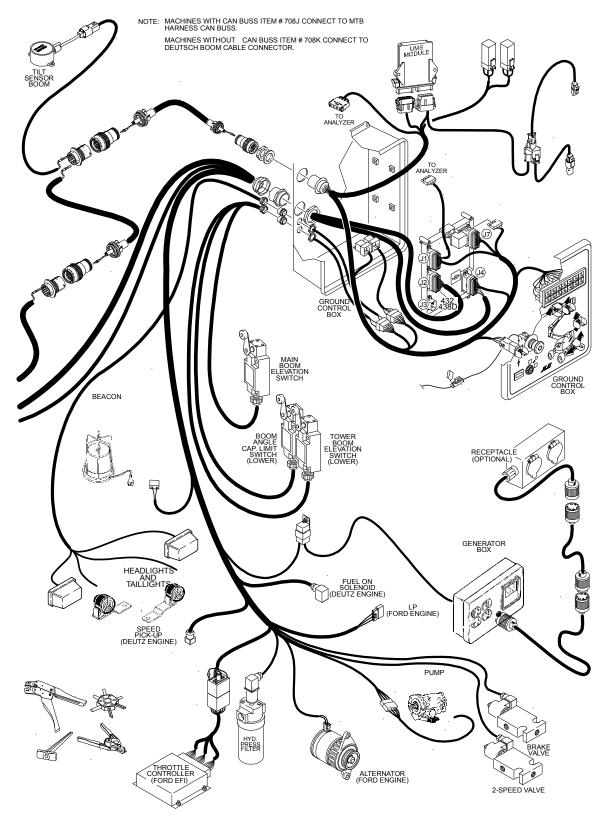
Electrical Components Installation w/ADE (S/N 0300064432 to S/N 0300069000) - Sheet 2 of 2
